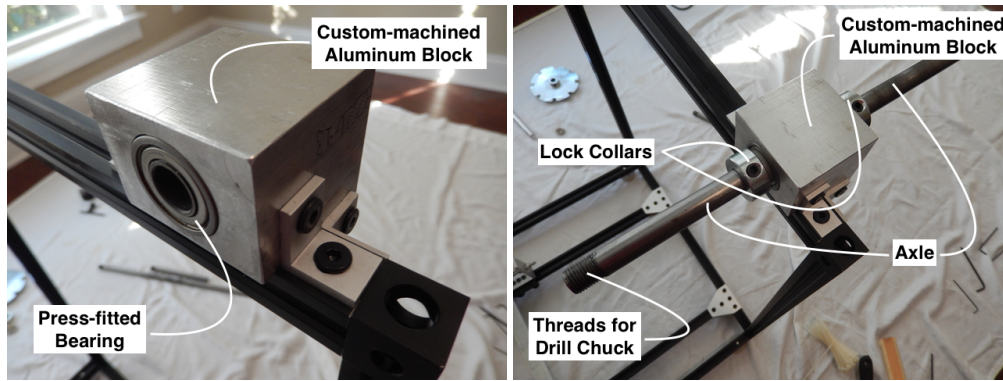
Axle Holder. *Left:* Axle holder without axle inserted, *Right:* Axle holder with axle inserted.
